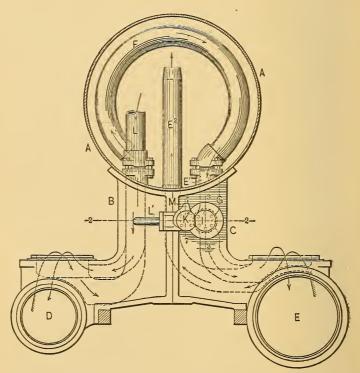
Front Elevation (partly in Vertical Cross Section) Schenectady Compound.
